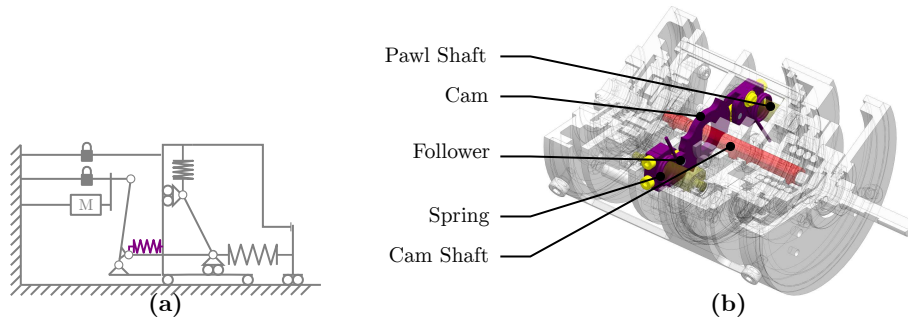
Threshold Subsystem. a: Schematic. b: Cross-sectional view of CAD-model. The threshold consists of a cam on the cam shaft, on which two spring-loaded followers engage.
